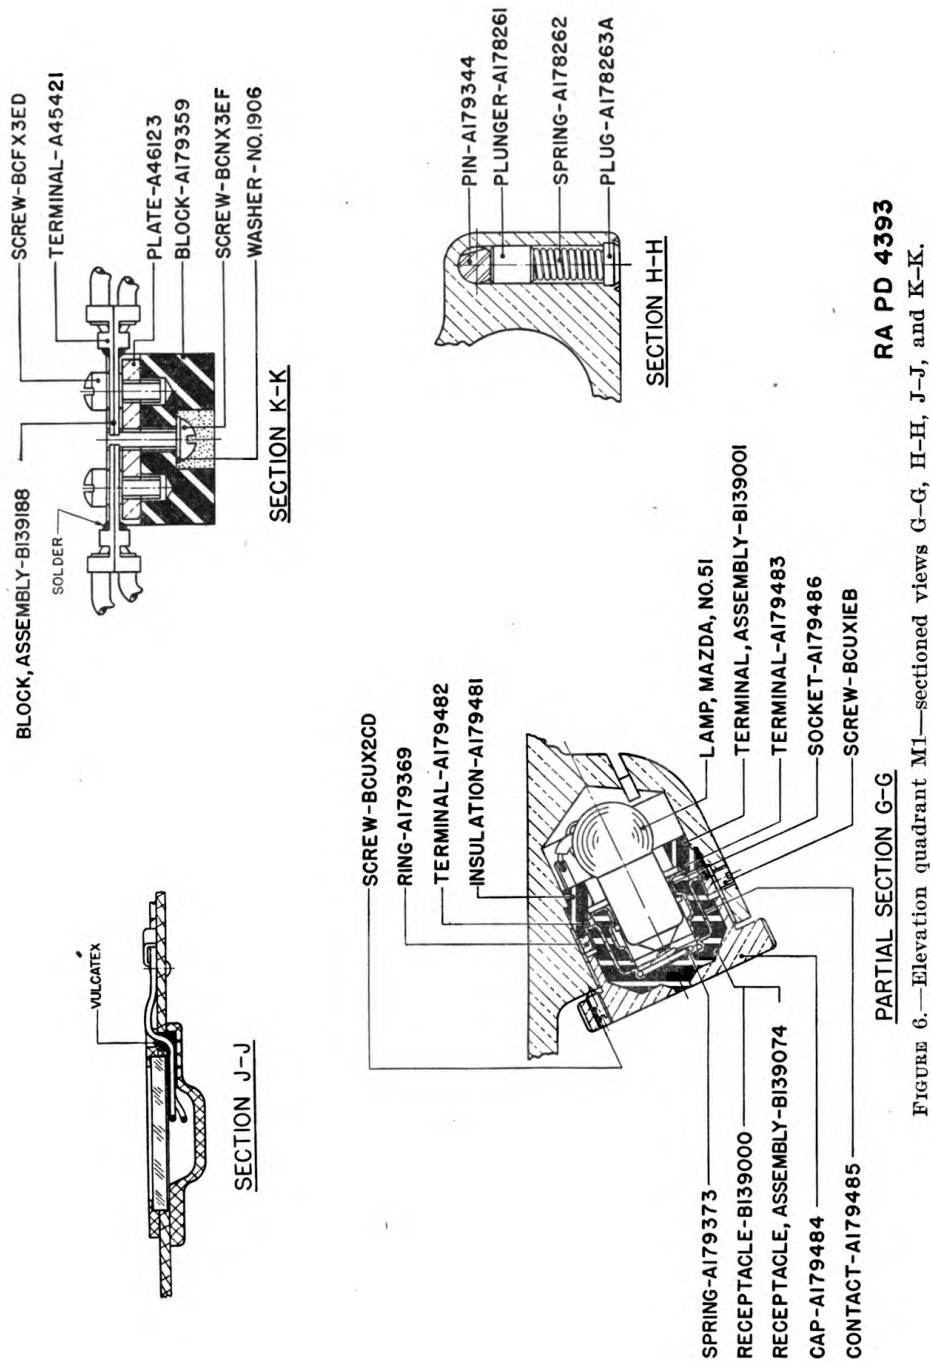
Elevation quadrant M1—sectioned views G-G, H-H, J-J, and K-K.
